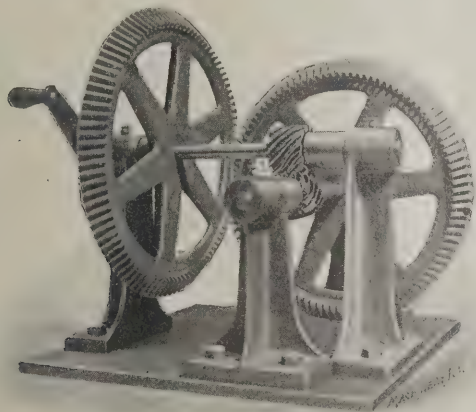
Two Shafts Connected by both Spiral and Skew Bevel Gears.
